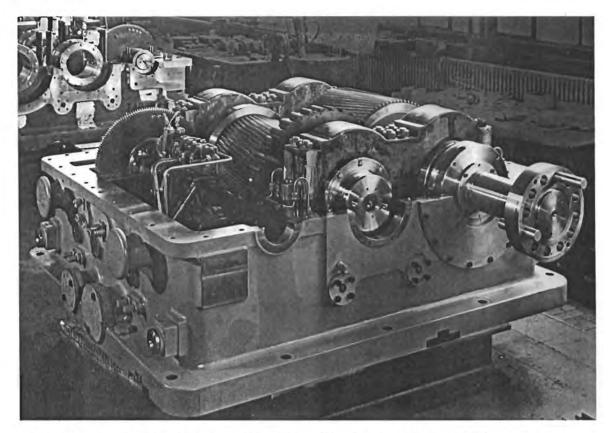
Gearbox for a gas turbine-generator drive 40 MW, 4500/3600 rpm or 35 MW, 4500/3000 rpm.
